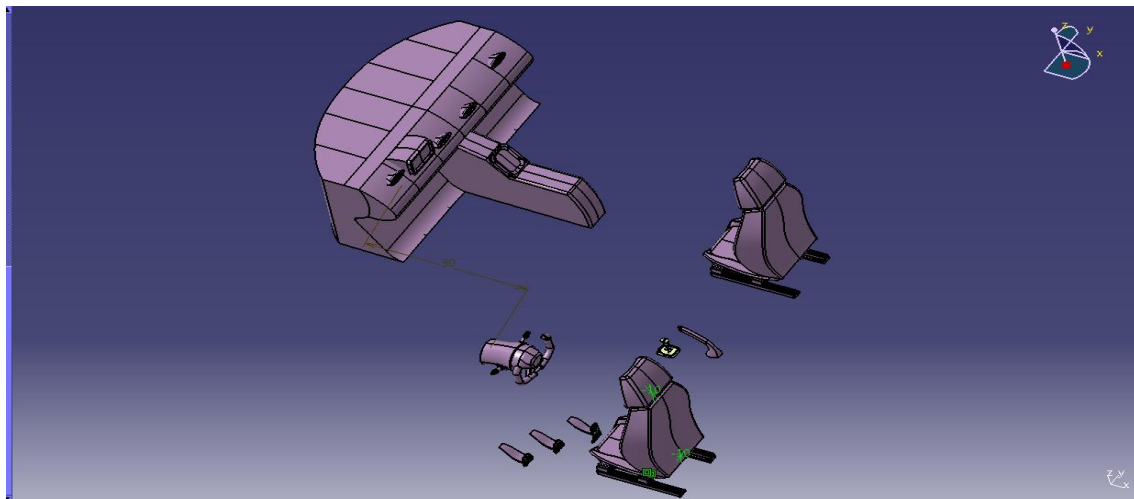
Definition of stages of throttle's pedal assembly.
